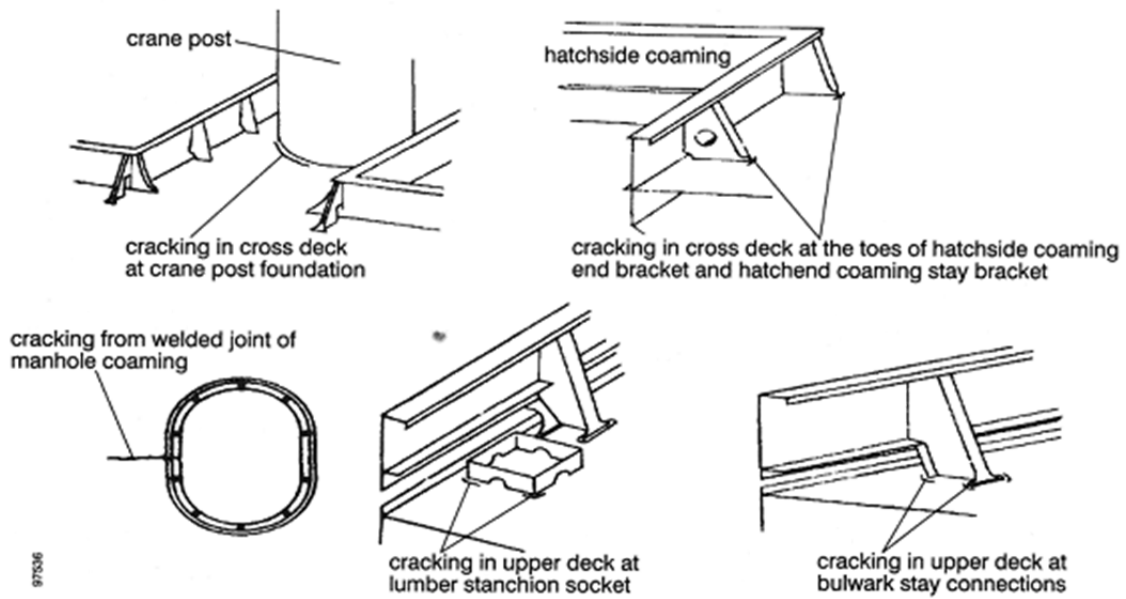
(1): Various cracking in upper deck plating
